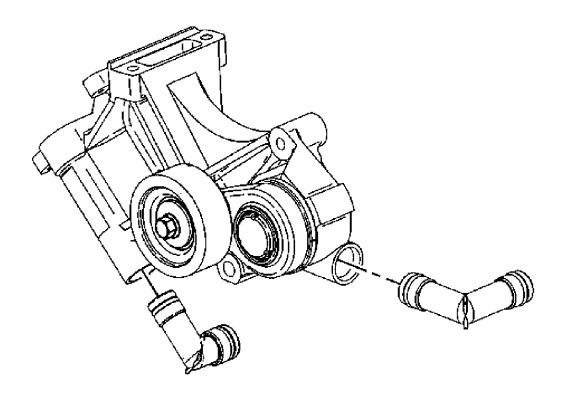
View Of Drive Belt Tensioner Courtesy of GENERAL MOTORS CORP.
